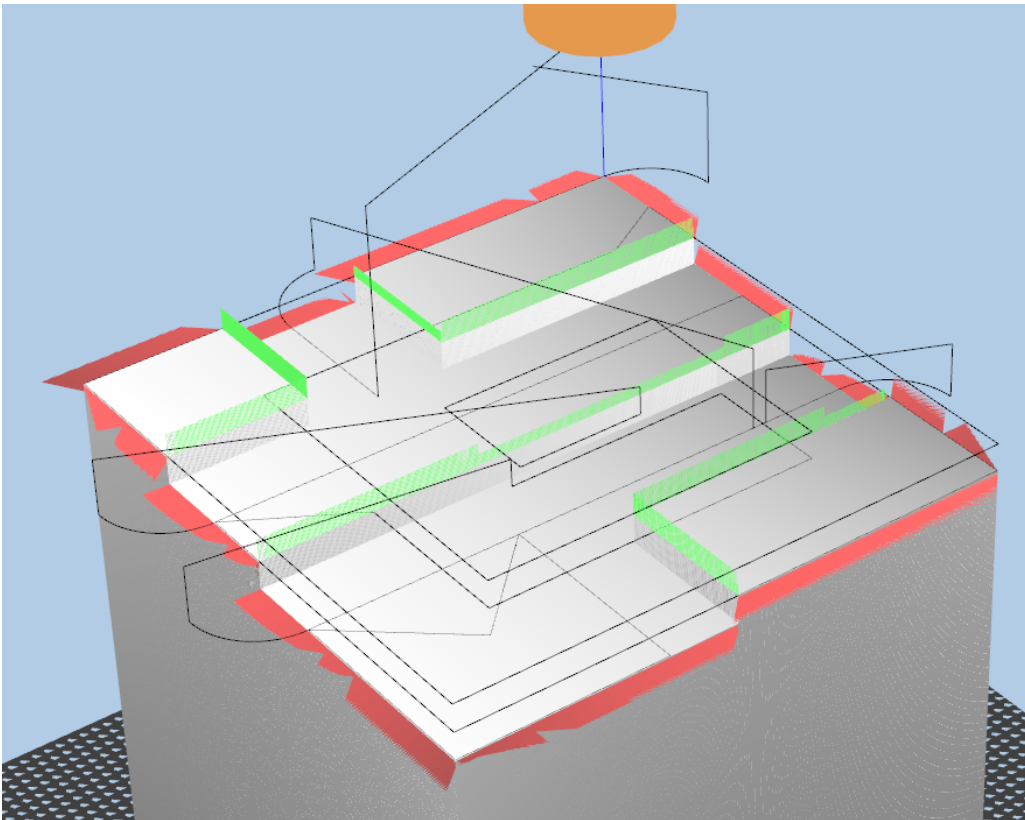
Tool path A in up milling (burr height = 1000 μm).
